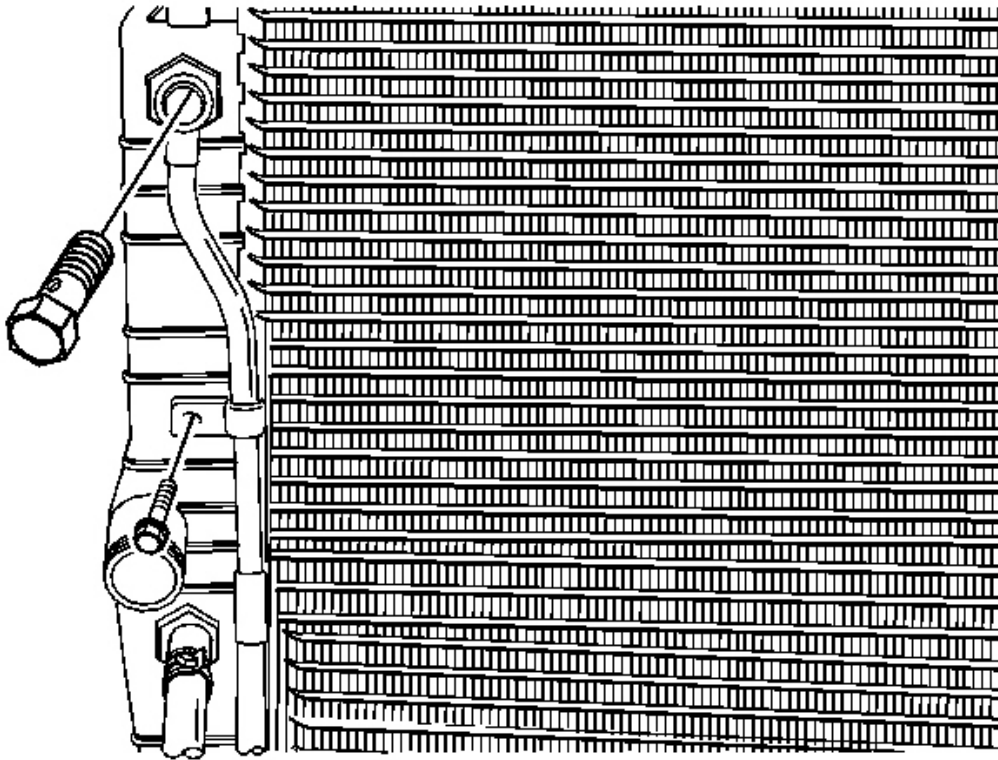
Front Outlet Pipe, Clip, Bolt & Radiator
